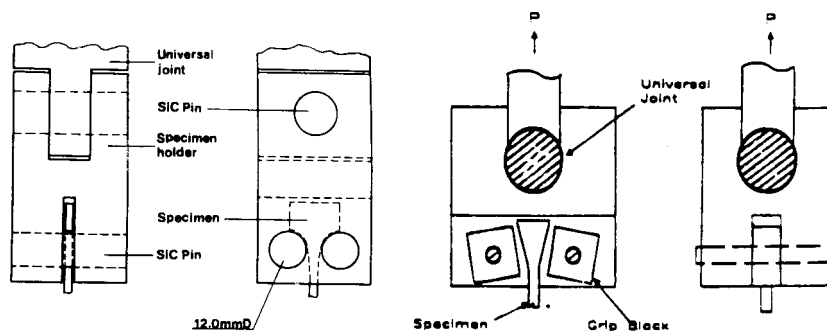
Examples of Shoulder-Loaded, Passive Gripping Systems for Flat Specimens (4, 5)
